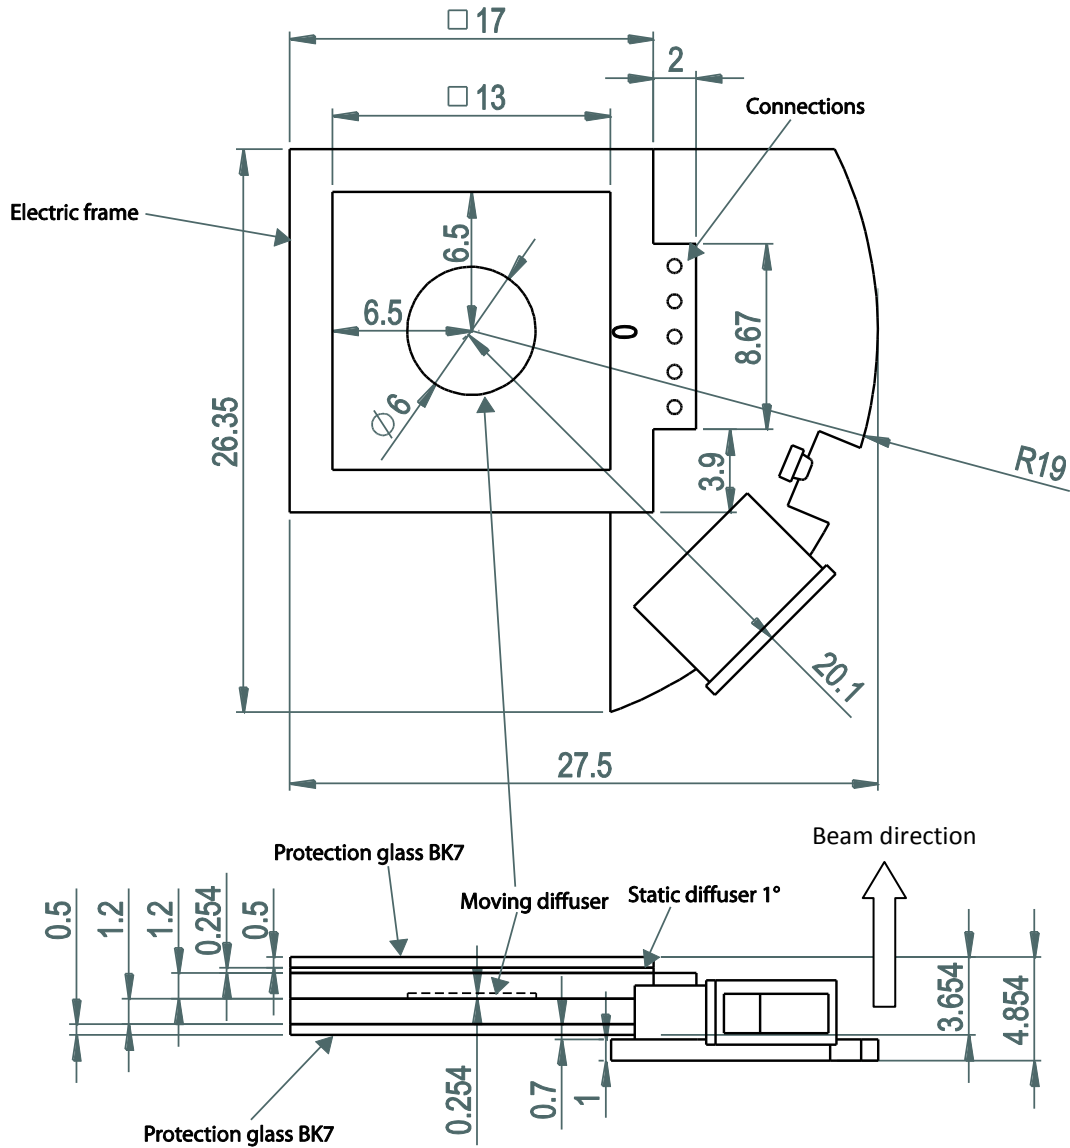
Mechanical drawing of the LSR-5-17-0-E (unit: mm)
